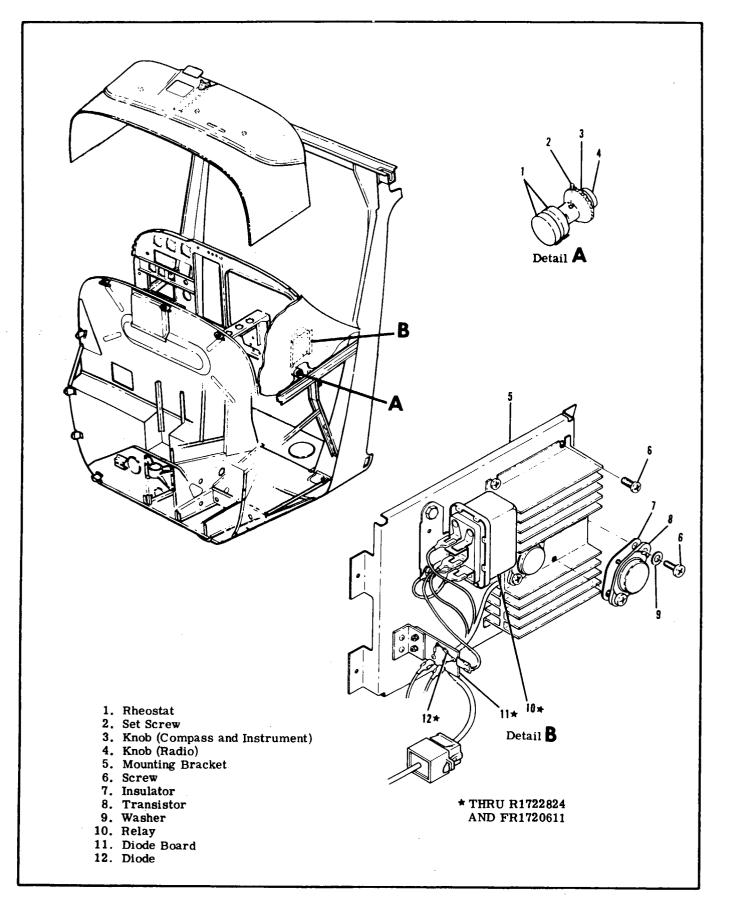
Instrument, Dome and Courtesy Light Installation.
